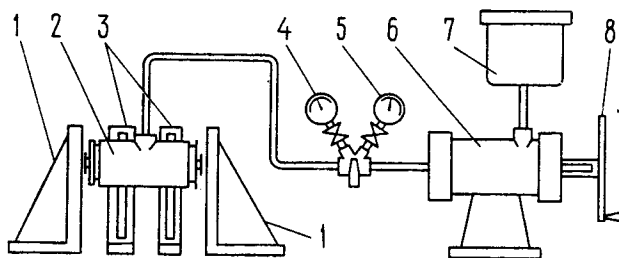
Rear Wheel Cylinder Checking Setup: 1 - piston stops; 2 - cylinder under test; 3 - cylinder bracket; 4 - low-pressure gauge; 5 - high-pressure gauge; 6 - pressure build-up cylinder; 7 - vessel; 8 - handwheel
